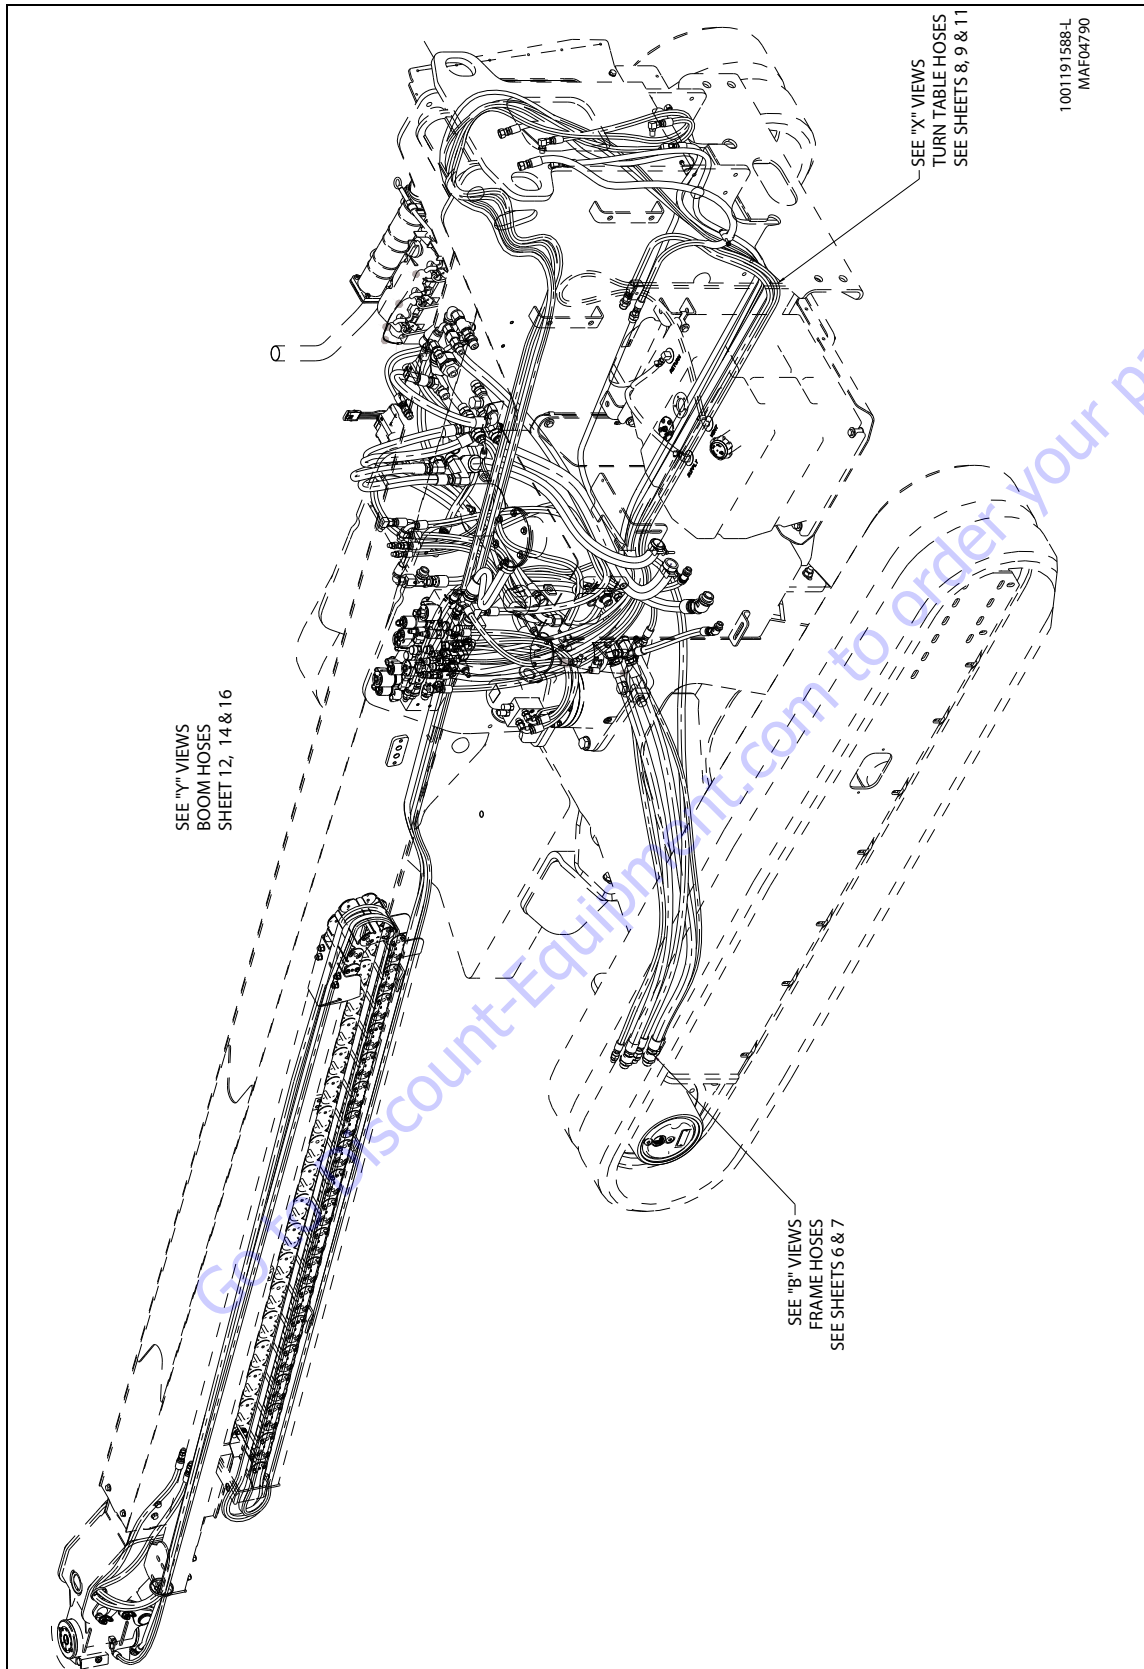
Hydraulic System Installation (400SC) - Sheet 5 of 16
